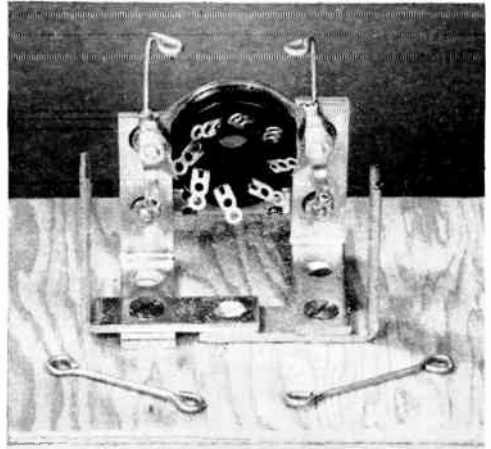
First steps in assembly, showing the manner in which the angle pieces are fastened to the baseboard. Much of the wiring can be done before fastening to the baseboard as described in the text. The pair of looped wires in the foreground show how the crystal-socket supports are made.
